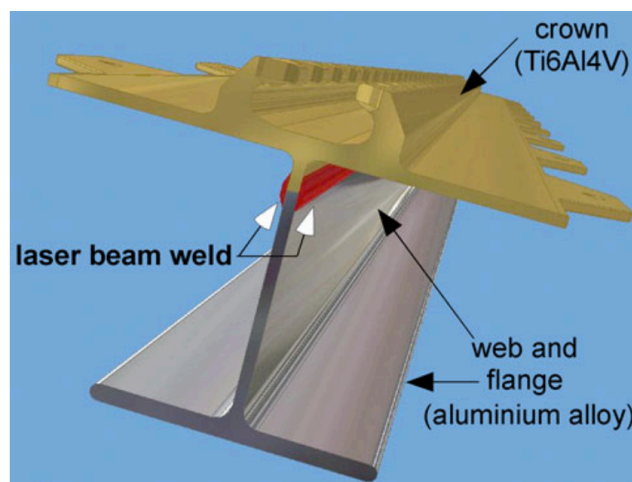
The passenger seat track as a laser beam welded dissimilar joint (conceptual design after AIRBUS. The total height of the assembly is about 61 mm, the web height about 45 mm and the aluminium alloy flange width about 50 mm) (54)
